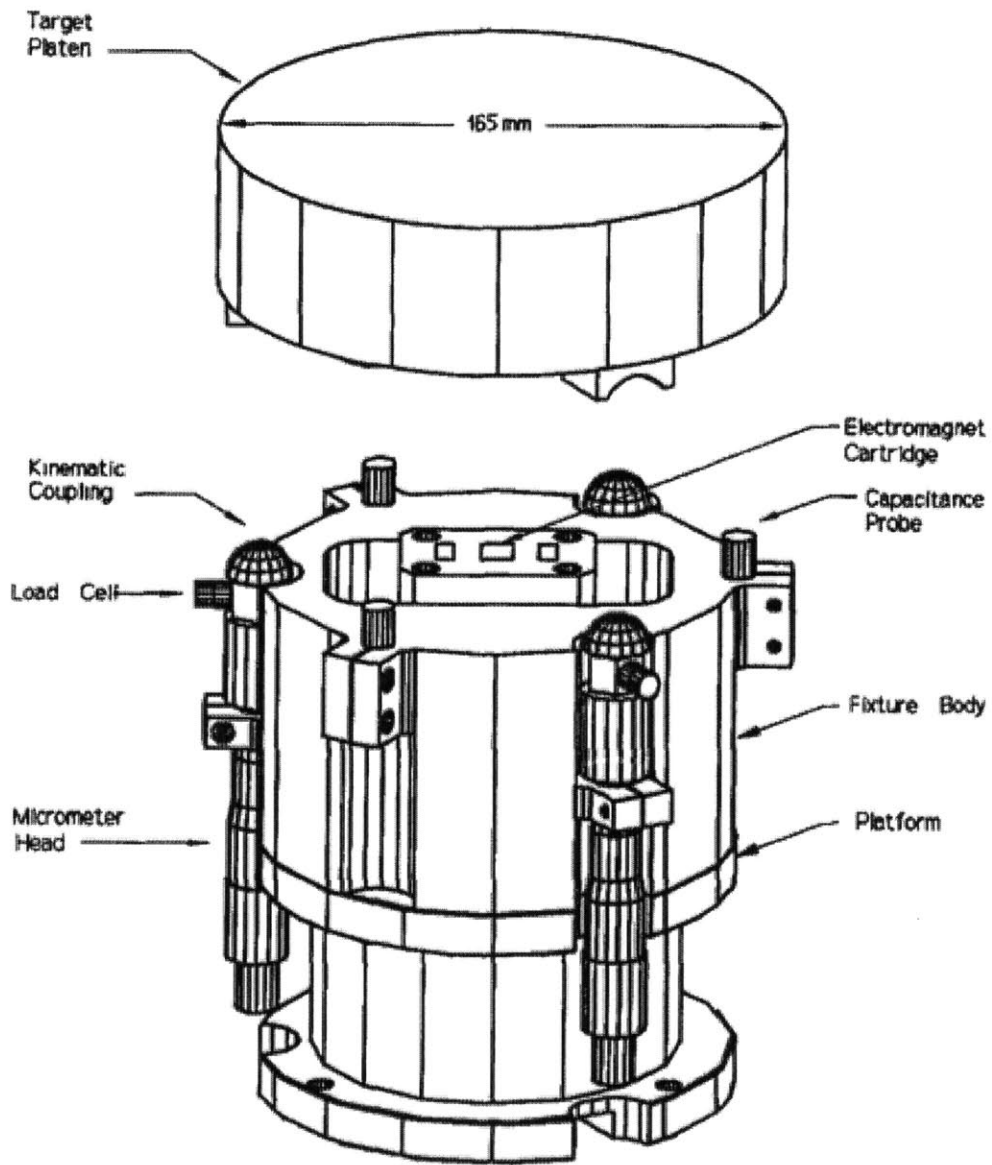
CAD Drawing of the Poovey Test Fixture (taken from [6])
